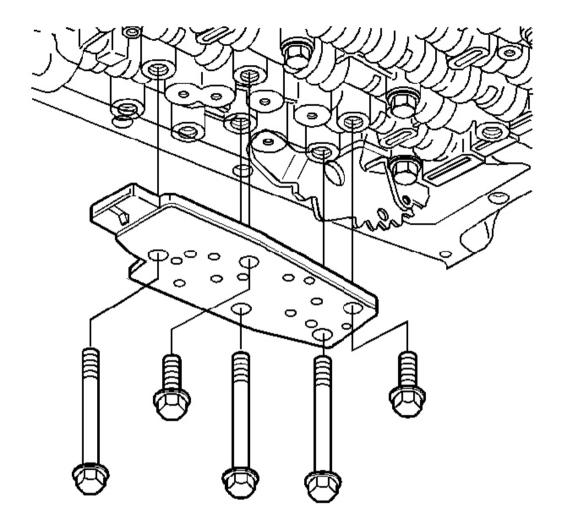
Identifying Transmission Fluid Pressure Switch Courtesy of GENERAL MOTORS CORP.
